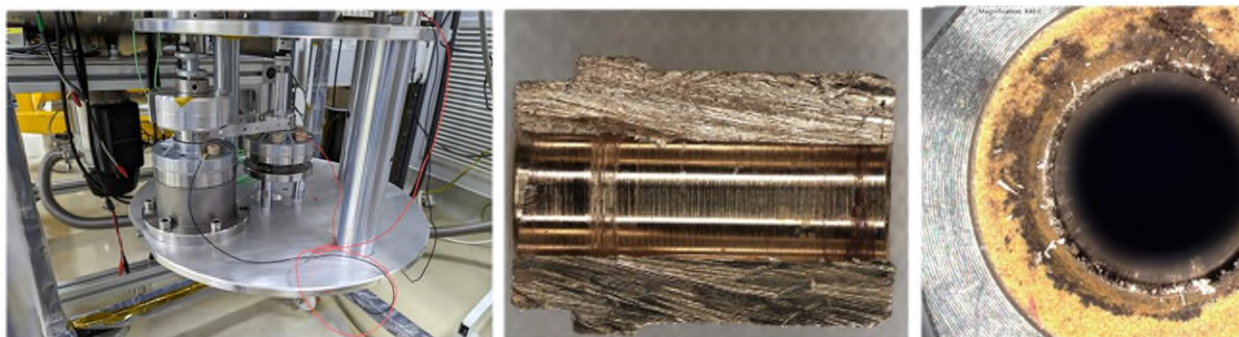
Vacuum test rig for bushing and axial seal evaluation (left), early bronze bushing failure (center), axial seal after 10,000 revs in air (right) with some bronze debris embedded at inner interface
